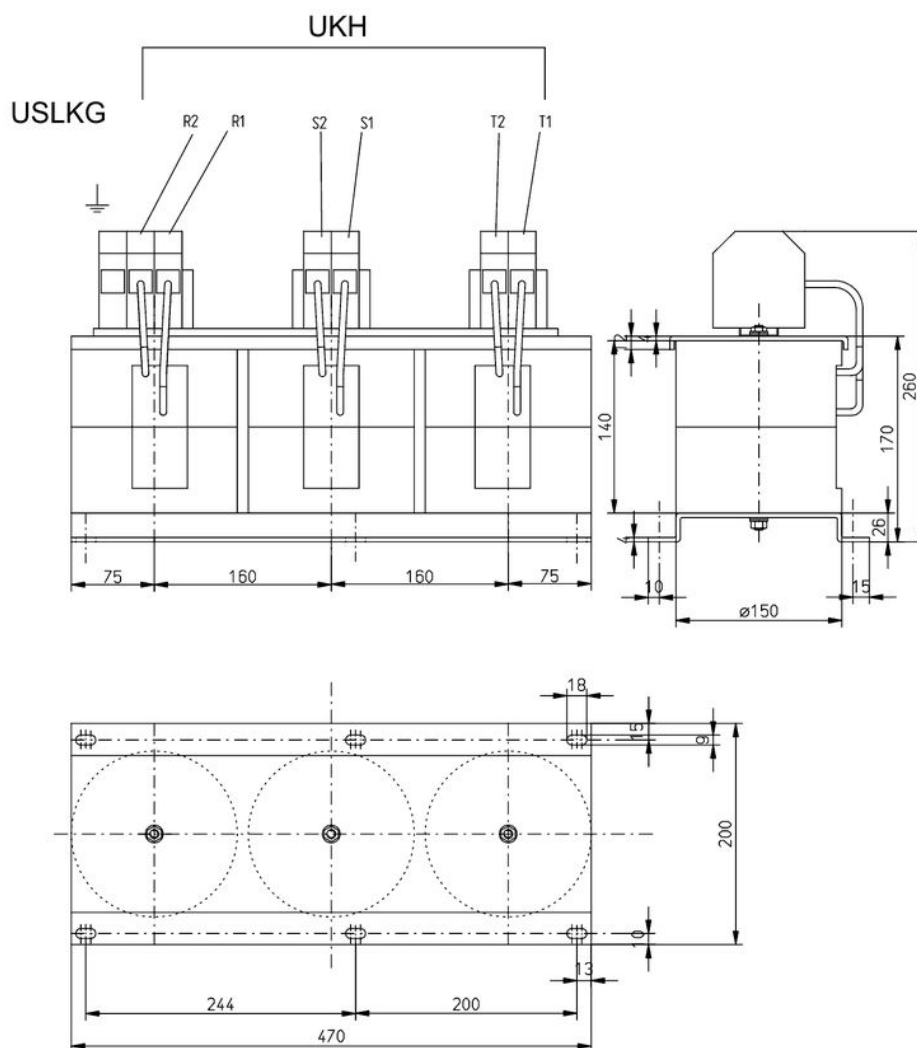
Dimensions [mm] of the choke module 13015502: Free dimension tolerance acc. to DIN ISO 2768-c, bent across the direction of rolling (junction in insulation tube)
